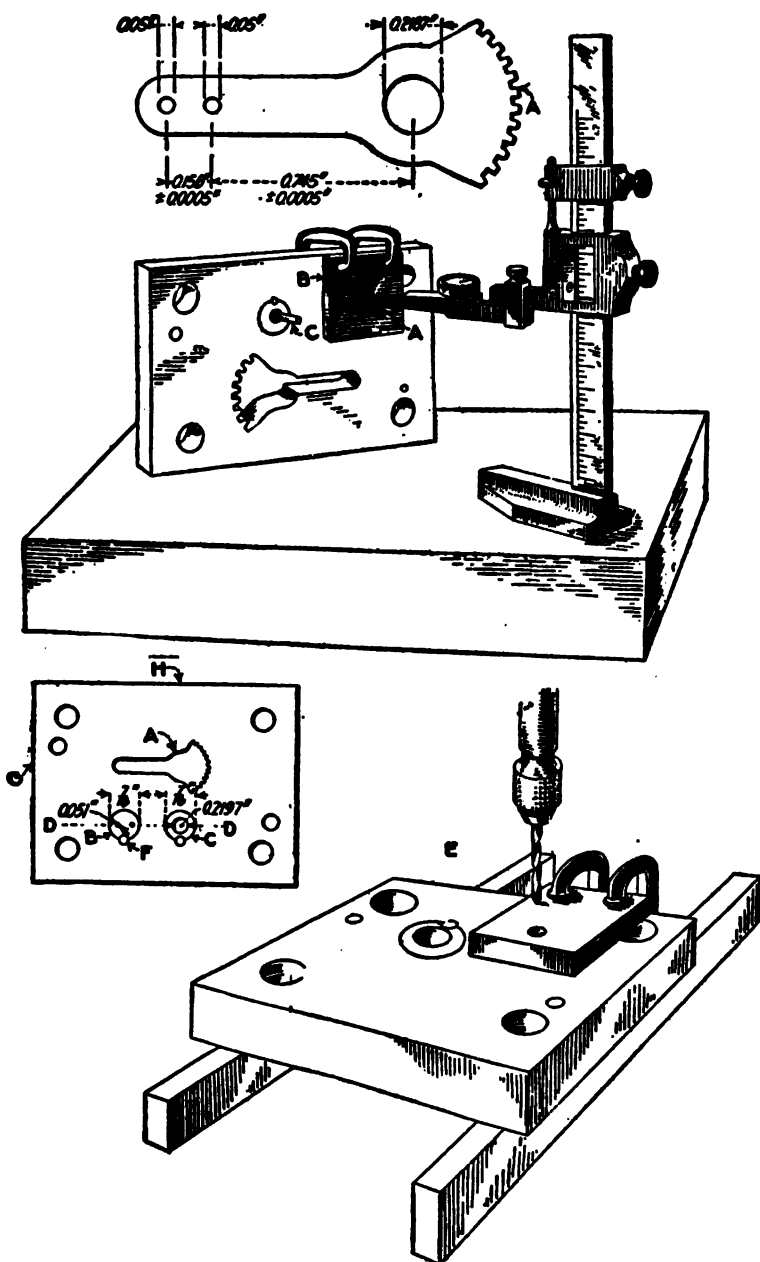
LOCATING SMALL HOLES ACCURATELY
